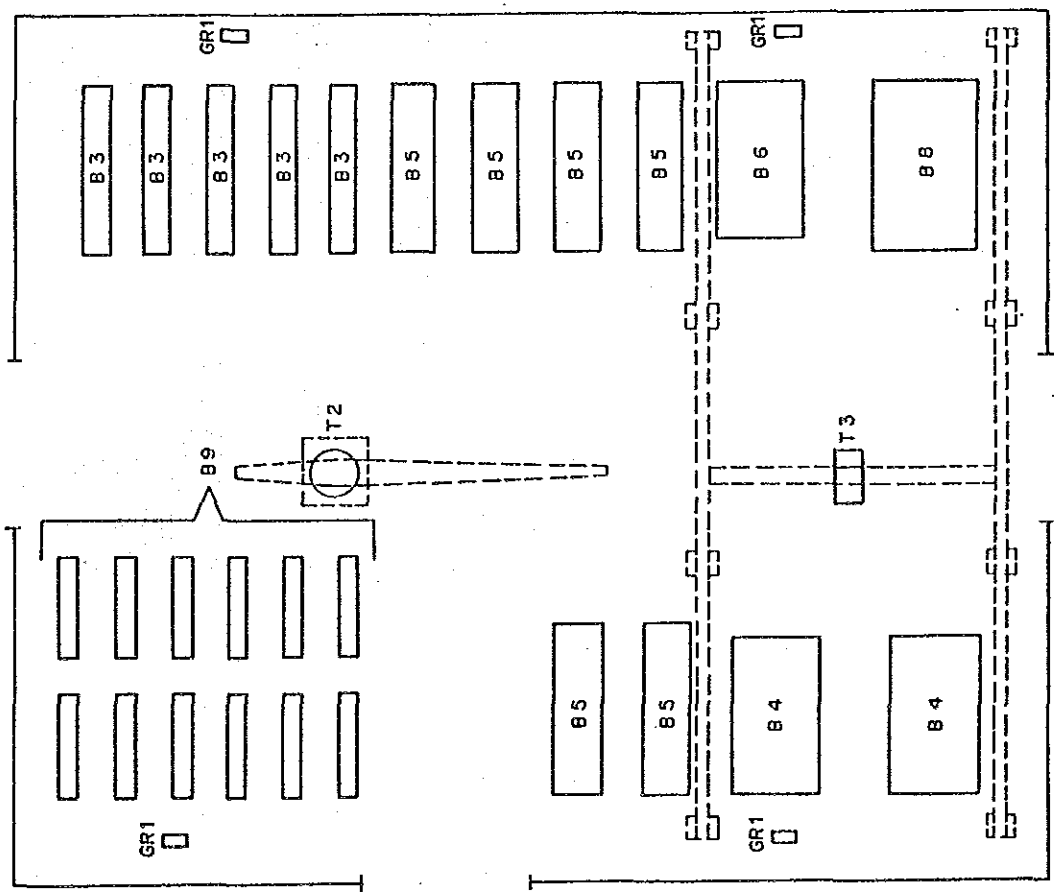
Arrangement of Assembling Shop No.8 for Large Size Components
